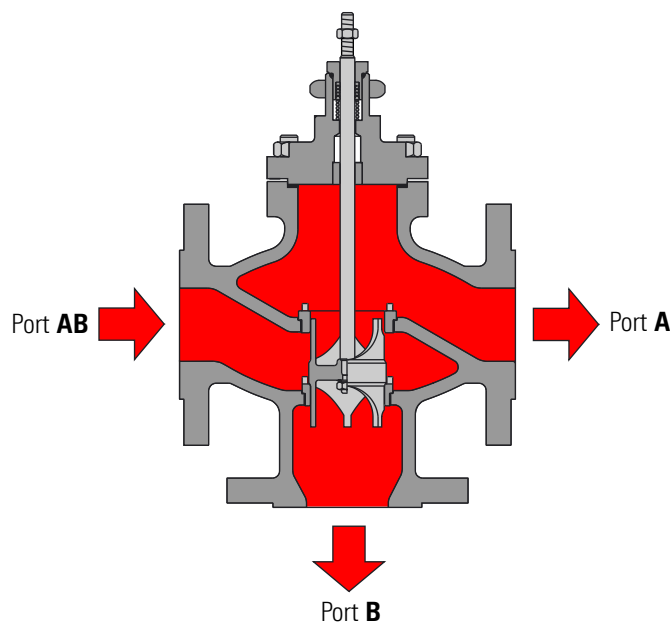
Three-port mixing valve used incorrectly as a diverting valve
